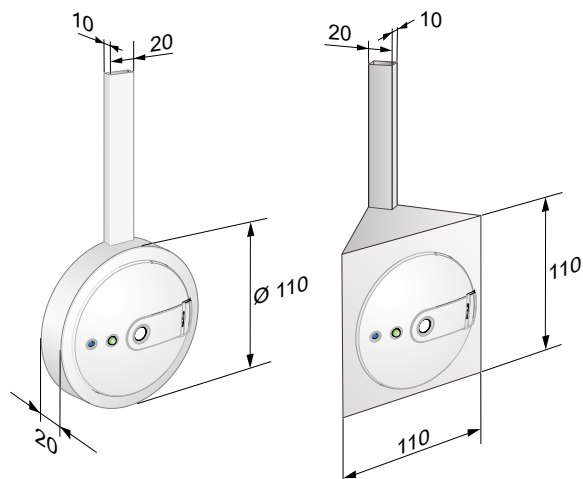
Detect SME, dimensions for wall mounted and corner mounted types. See separate installation guide for installation instructions.
